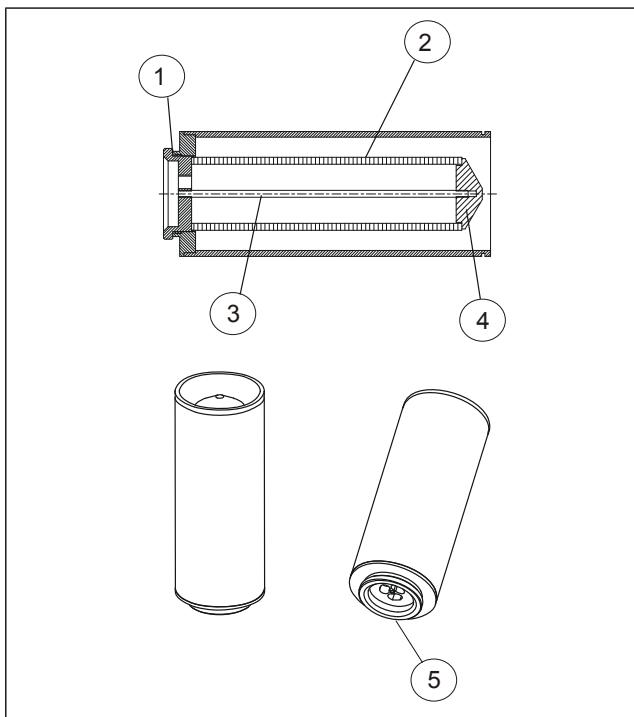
Construction of kappa sample vessel: 1 - filter core, 2 - filter (body + fabric), 3 - screw rod, 4 - filter cap, 5 - filter core.
